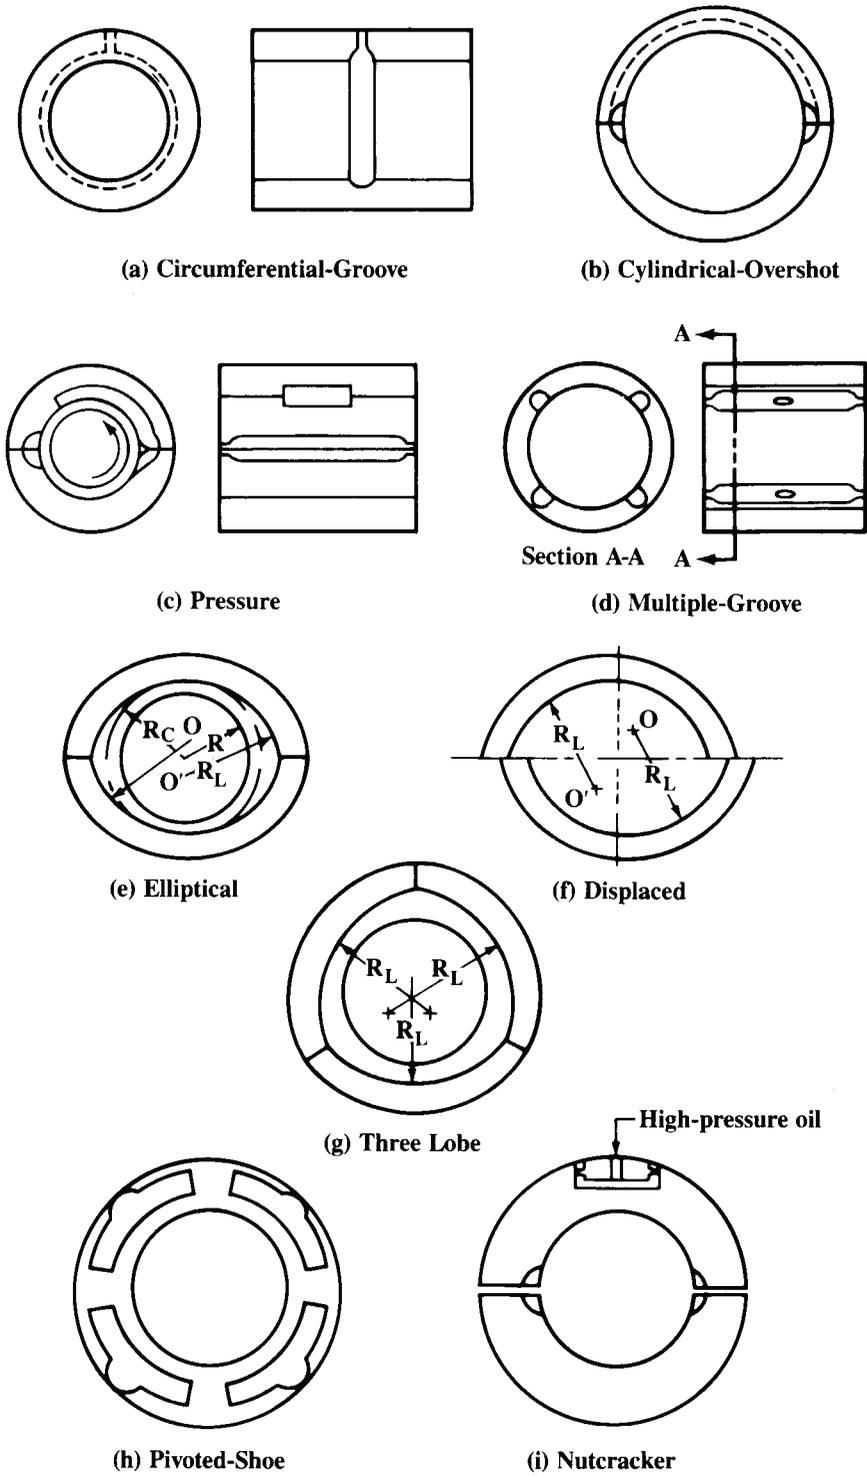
Typical shapes of several types of pressure-fed bearings.
